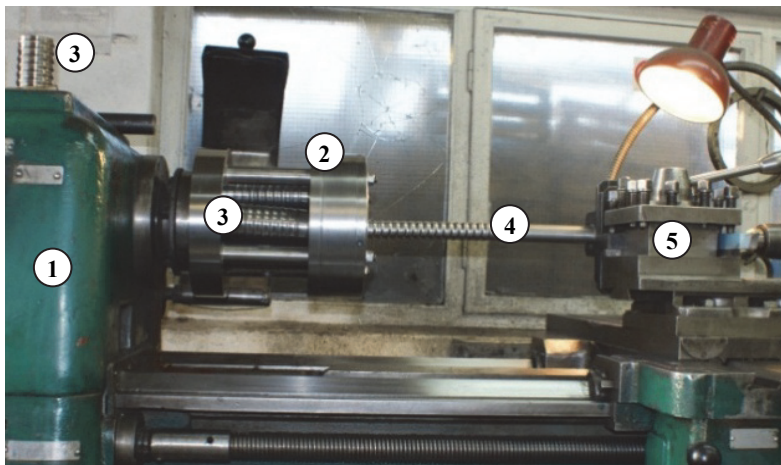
View of the stand for the external rope thread rolling with quick pitch on long pipe with thin wall: 1 – cruising lathe, 2 – angle head, 3 – rolls, 4 – workpiece (bar or pipe), 5 – holder of the pipe in the tailstock
